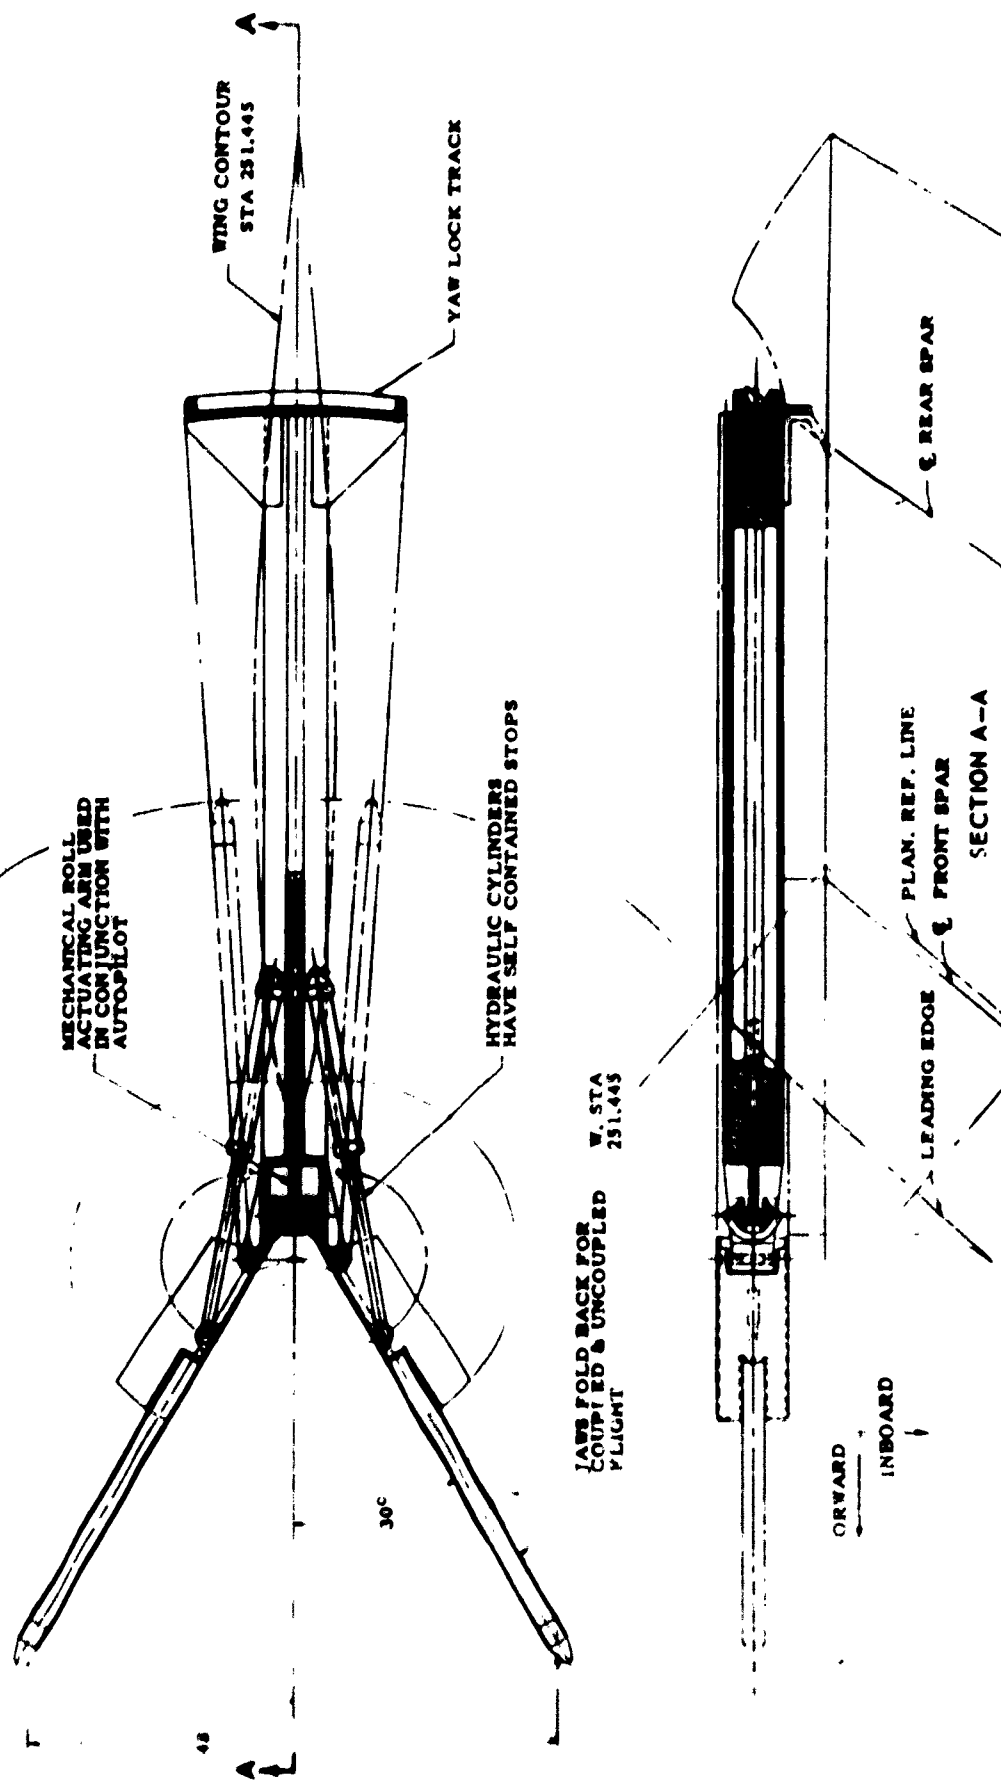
UNIVERSAL JOINT COUPLING - FIGHTER ARRANGEMENT
